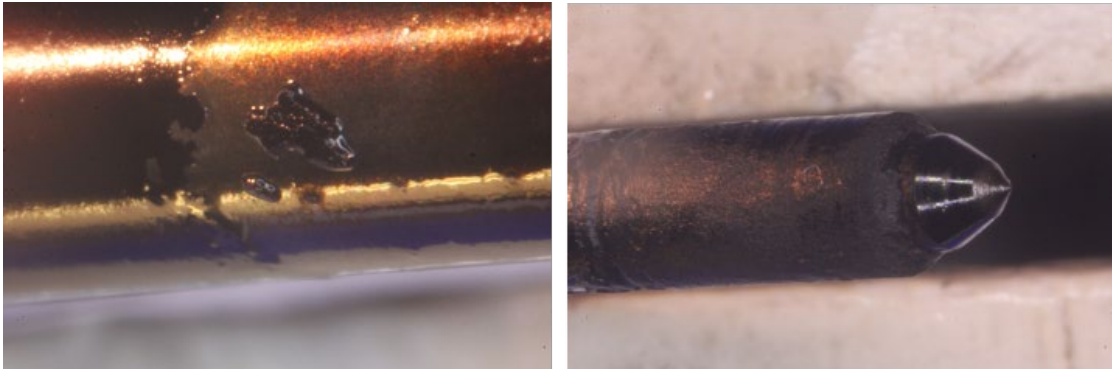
Microscope image of pyrolyzed diesel deposit and carbon build-up on injector internal needle.
